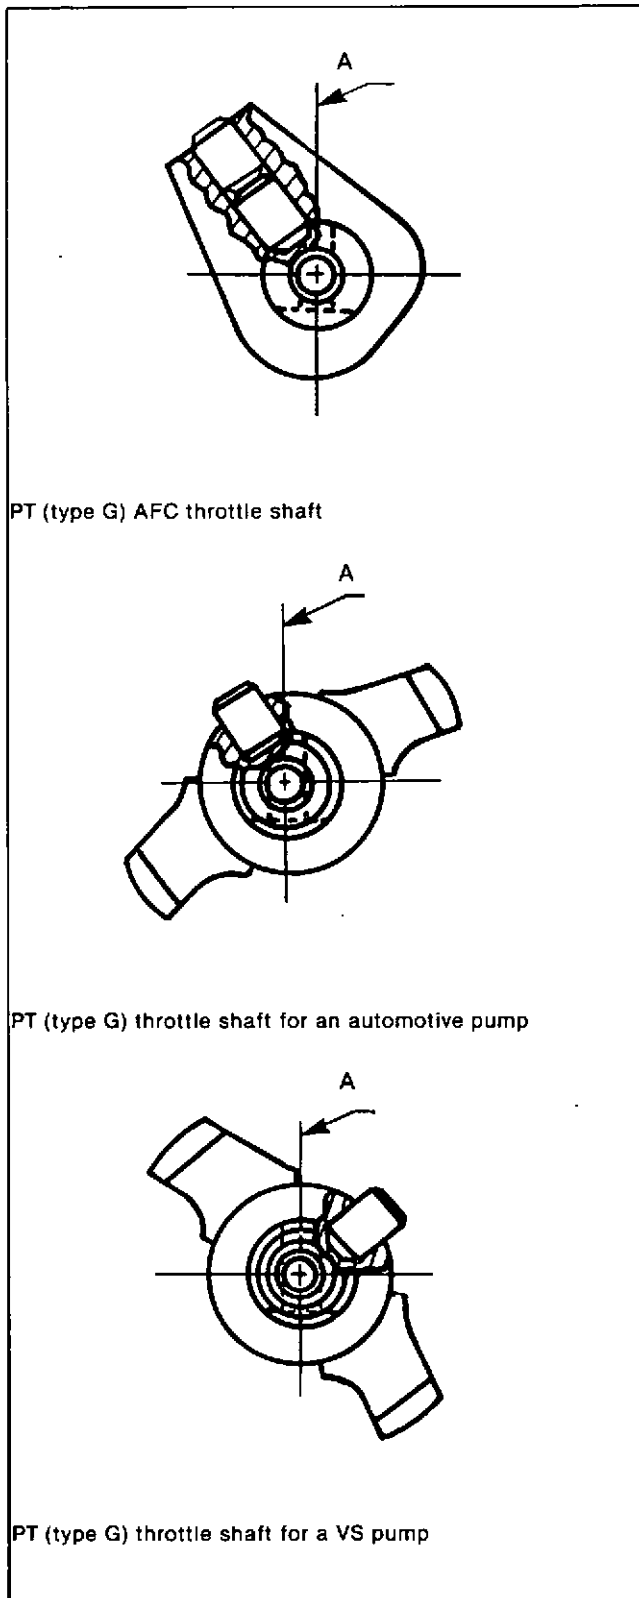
, (F5403). Location of the throttle stop on the throttle shaft.
